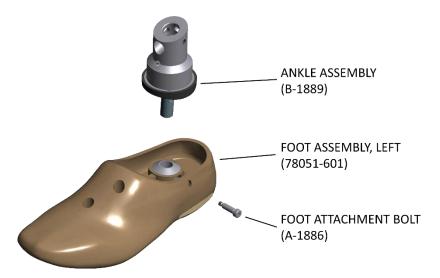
Foot, ankle assembly, and foot attachment bolt
